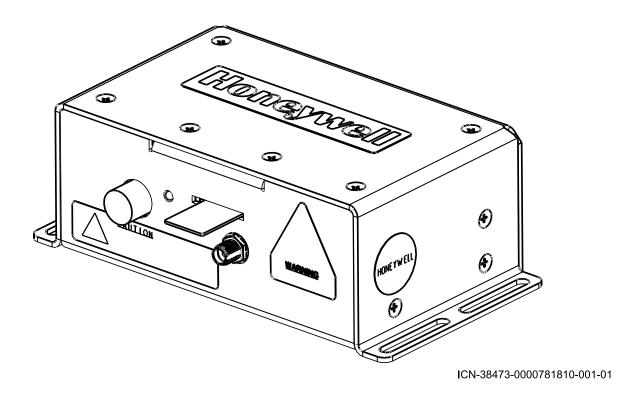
(Sheet 1 of 1) Indoor Unit Assembly
